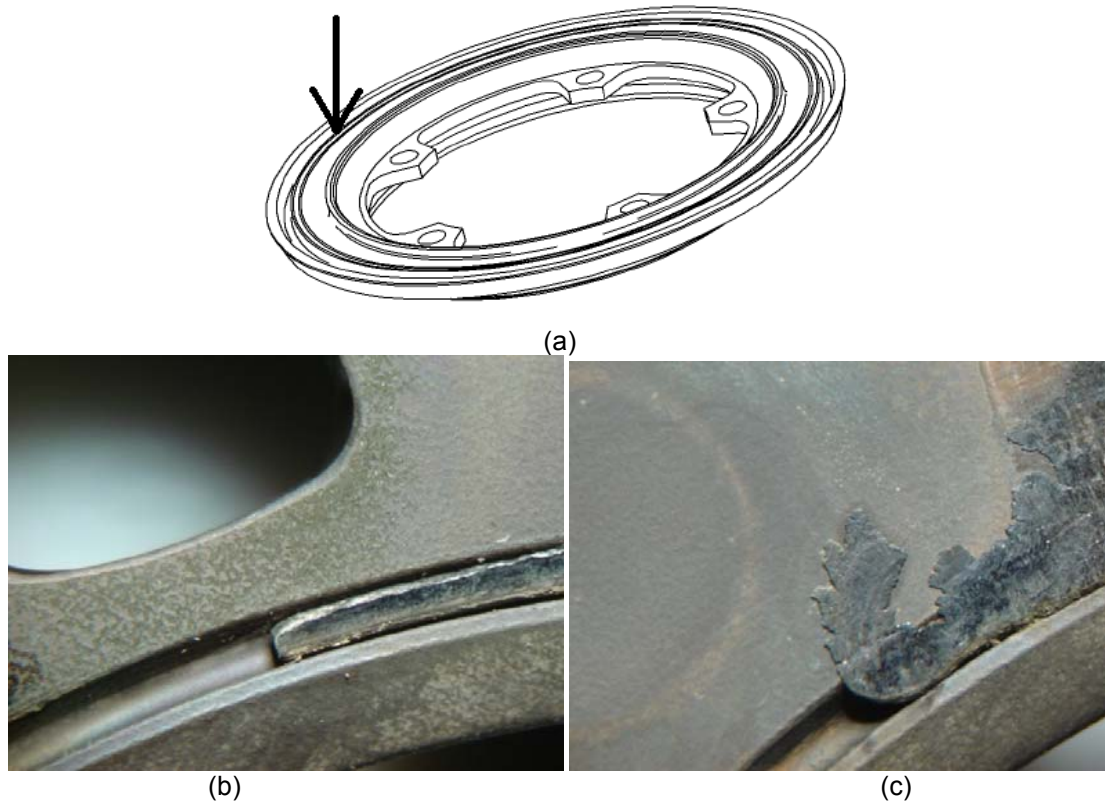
(a) Observation of the flange of one plate. (b) Fractured structural element. (c) Plastically deformed structural element.
